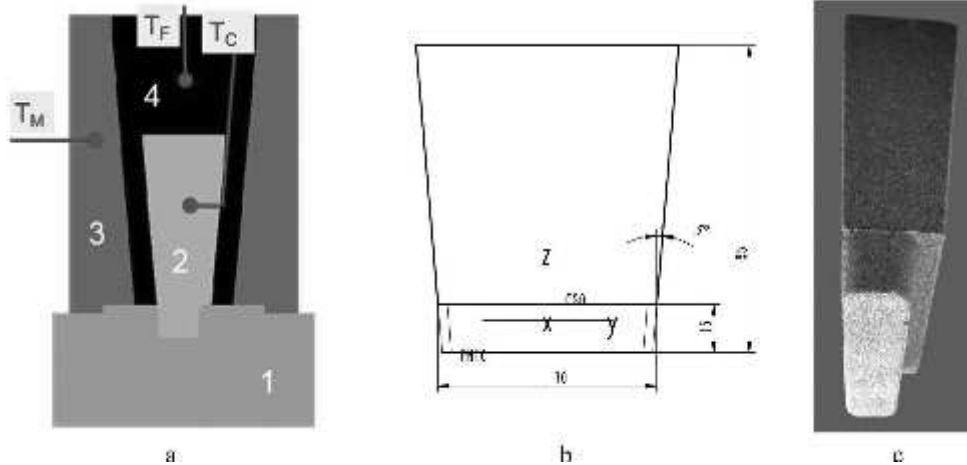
Test core geometry and mould setup. (a): Schematic cross section through the mould setup consisting of (1) a base plate, (2) a core, and (3) the upper mould part. The casting is formed in the cavity (4). The thermocouple positions are: T_M in the mould, T_C in the core centre, and T_F in the feeder centre. (b): Test core main dimensions and (c) realised core.
